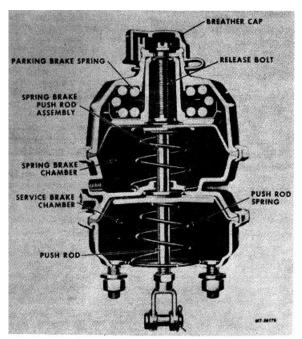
Double Diaphragm Spring Brake Chamber DESCRIPTION
